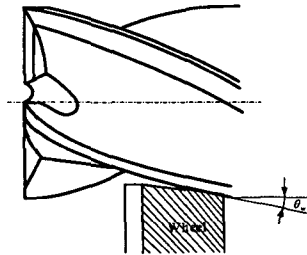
Method of generating an eccentric clearance surface by grinding tool
